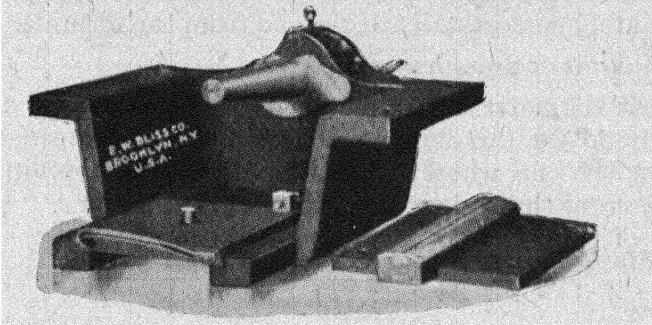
HORN FRAME WITH SUNKEN BOLSTER AND SLIDE PLATE COMBINED
